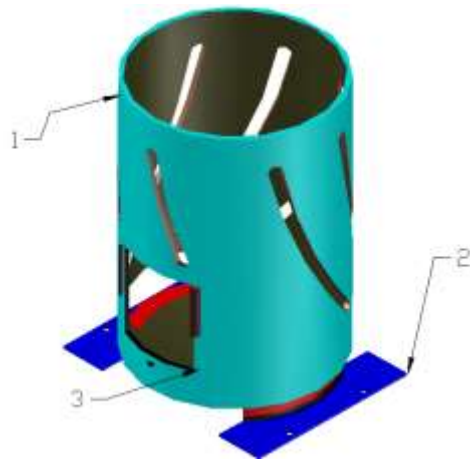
Three-dimensional view of the grooved cylinder and its parts, which includes:
